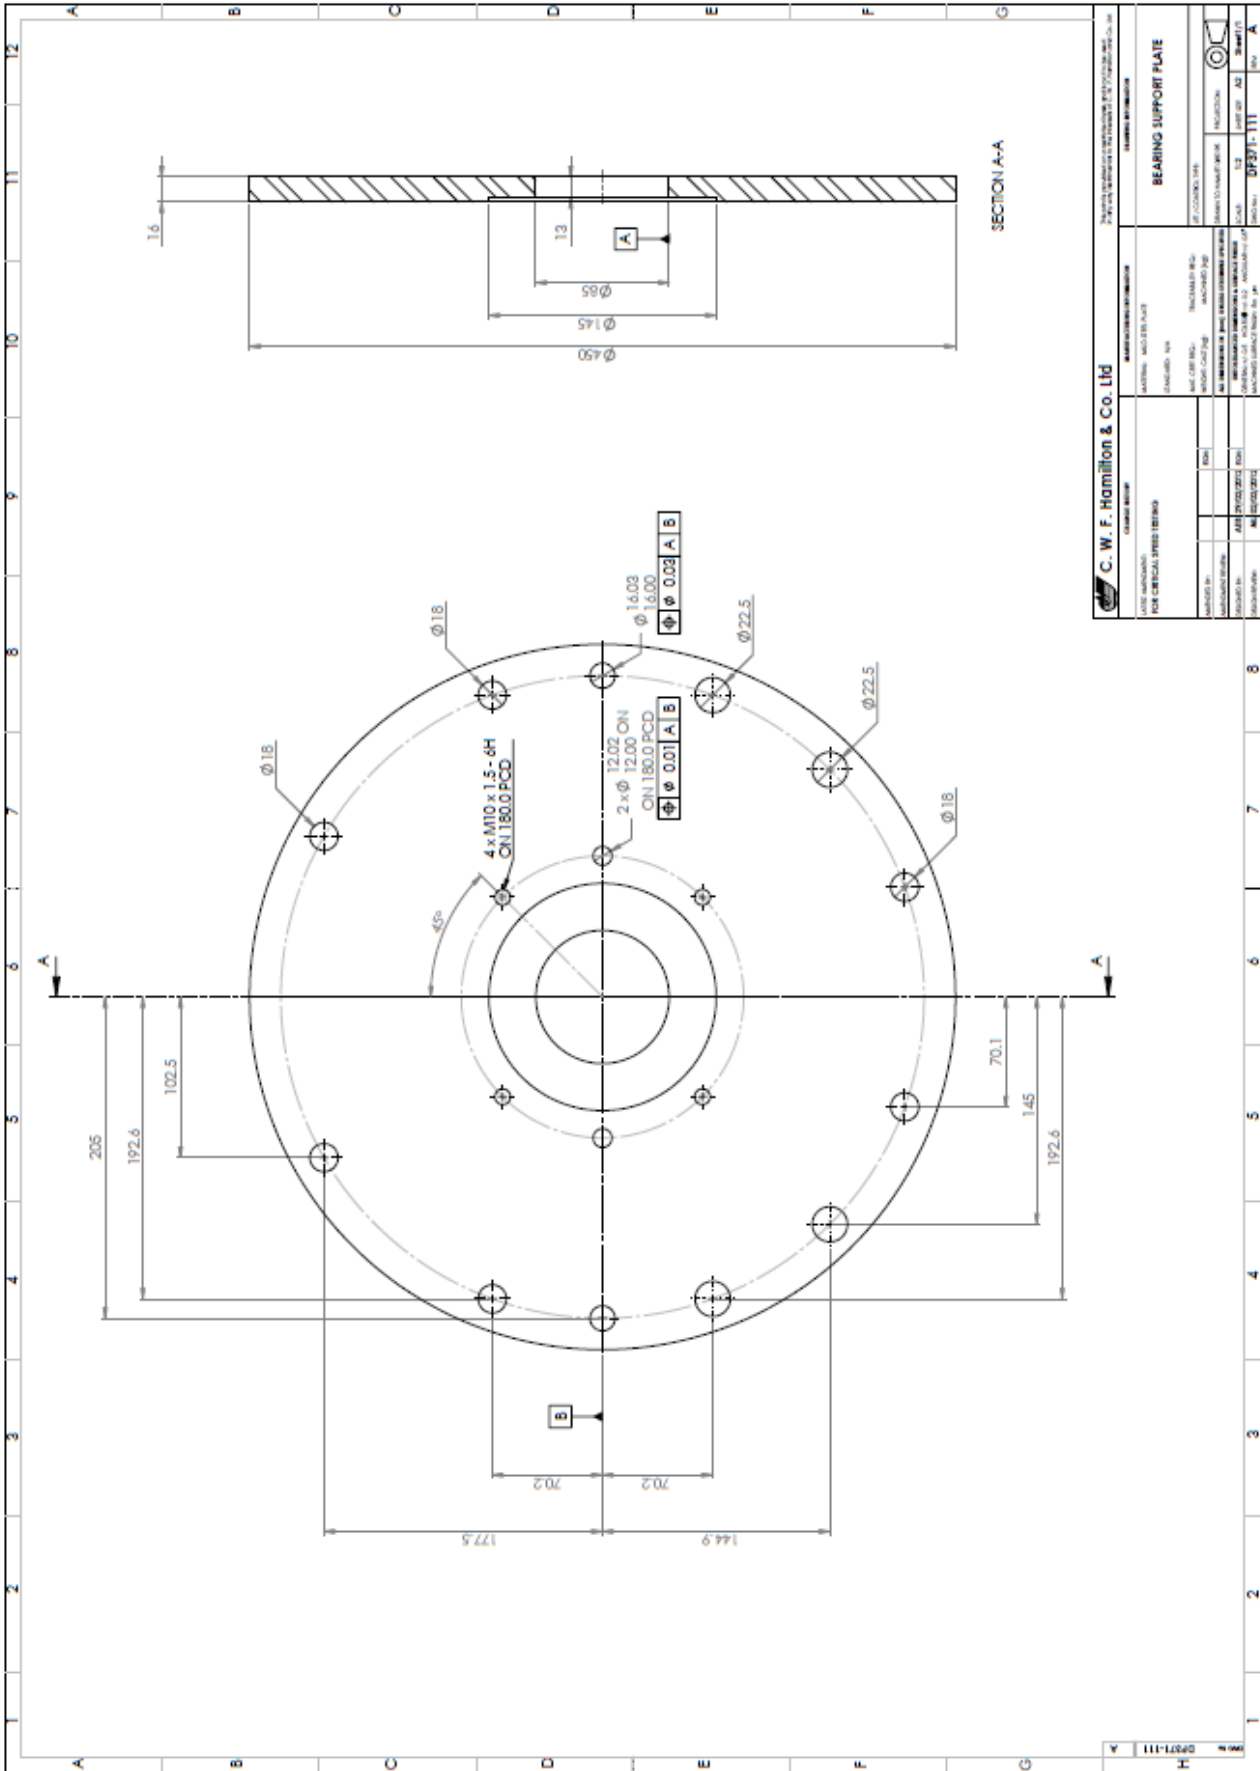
Drawing of the Spherical Bearing Housing Support Plate
